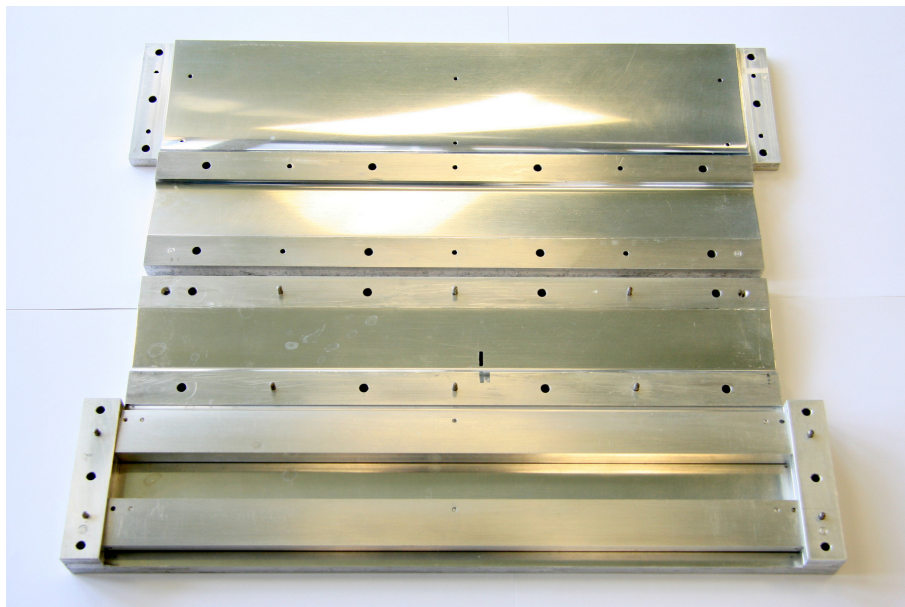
Wing and Control Surface Aluminium Mould and Inner Inserts
